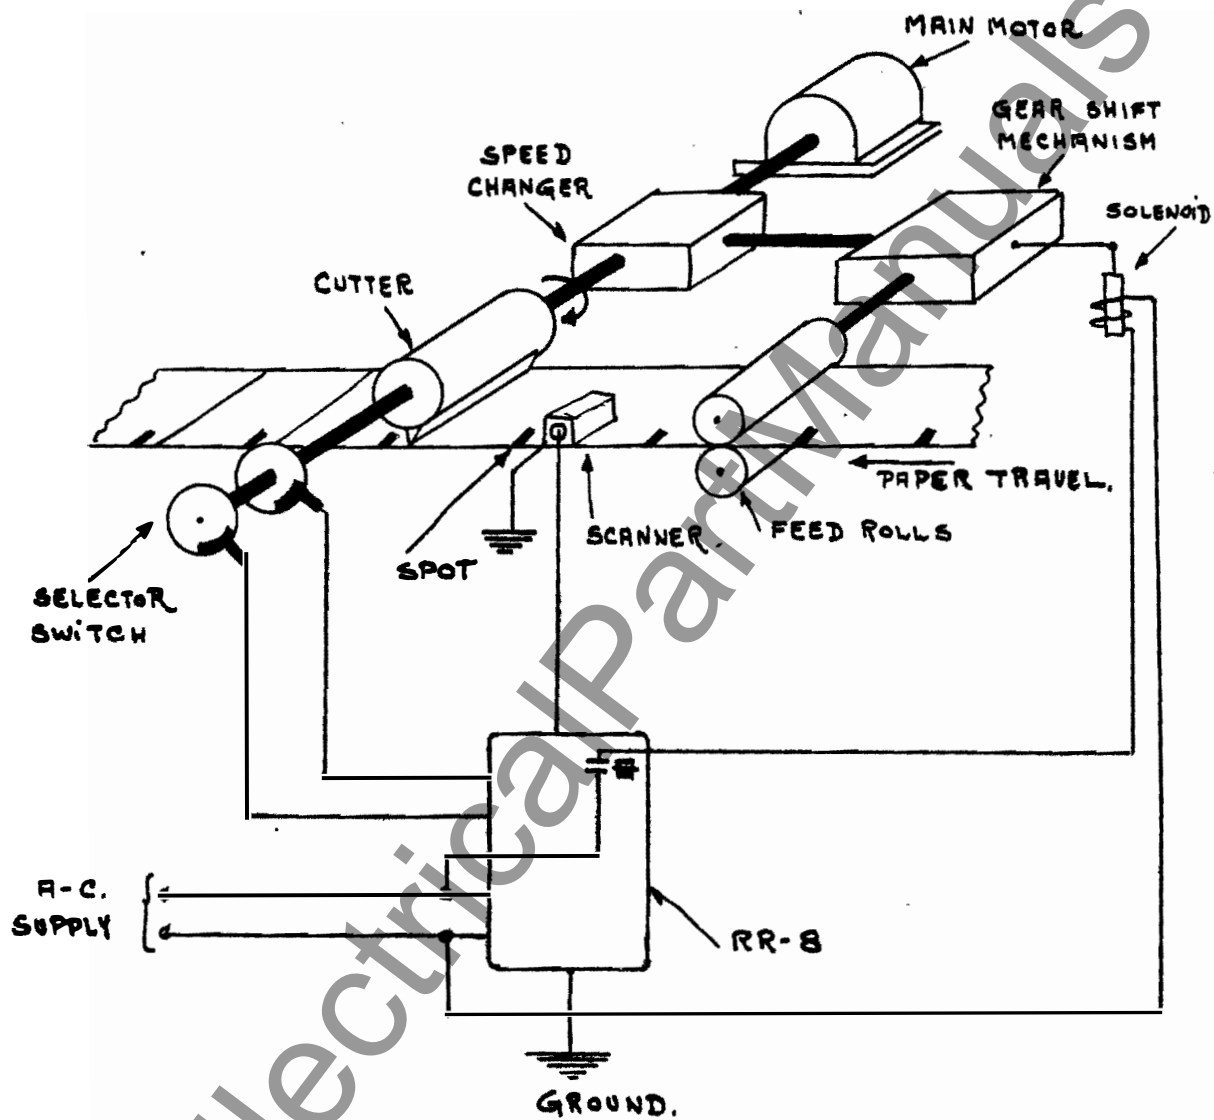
Schematic Arrangement of Mechanical Equipment
